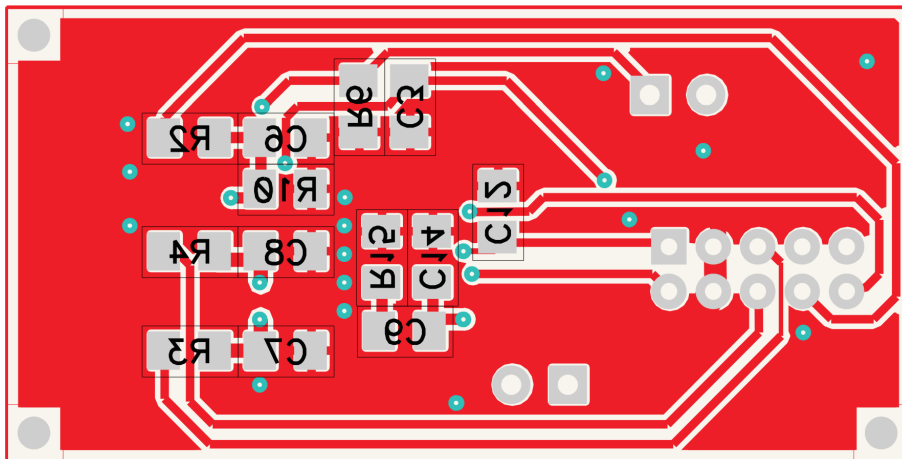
Daughterboard of UCC28070 bottom assembly [28]. Reprinted with permission.
